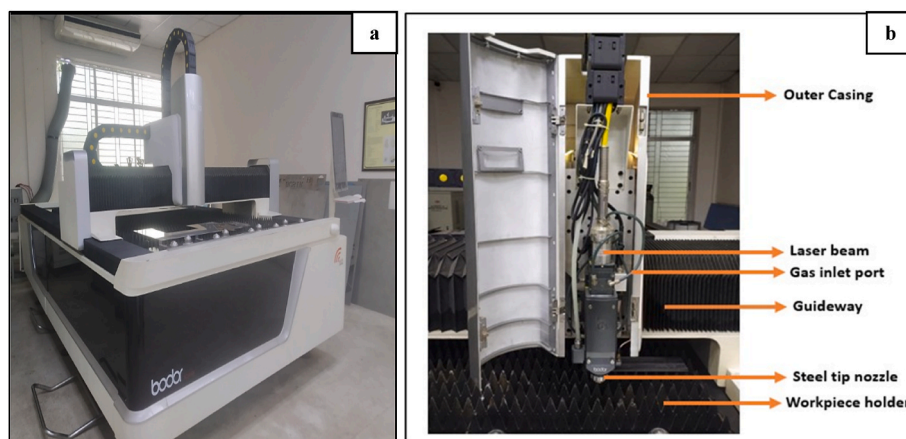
(a) Laser cutting machine, and (b) Head of the LBM.
